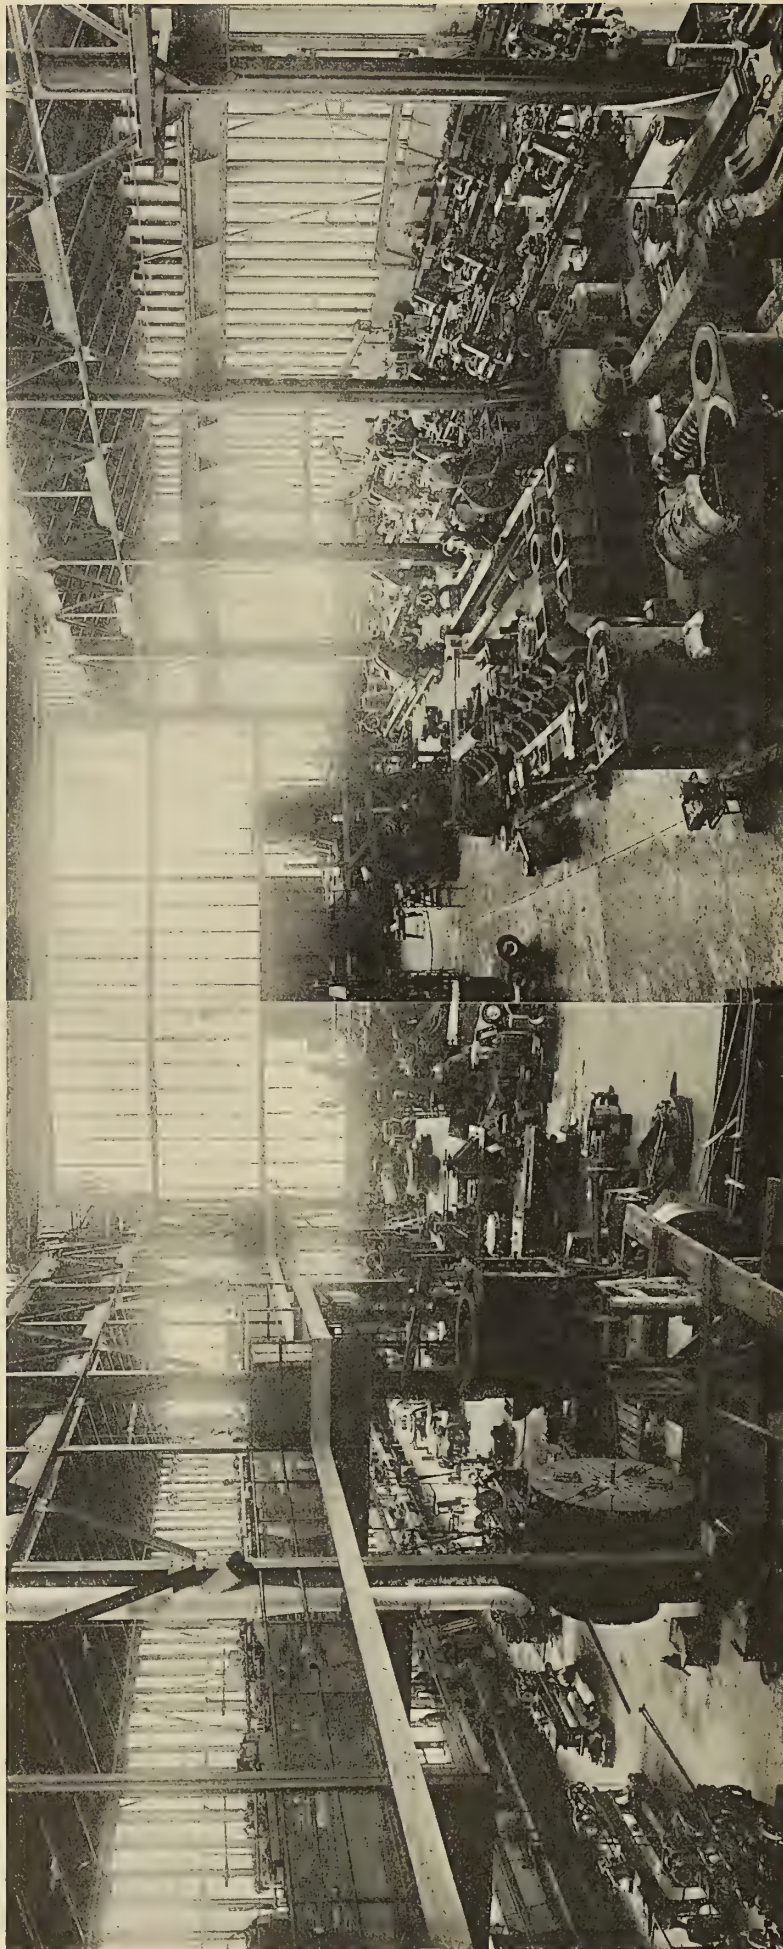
Machine Shop. Building is of Steel Frame Construction With Glass Sides. Gallery at Left for Light Machine Work
